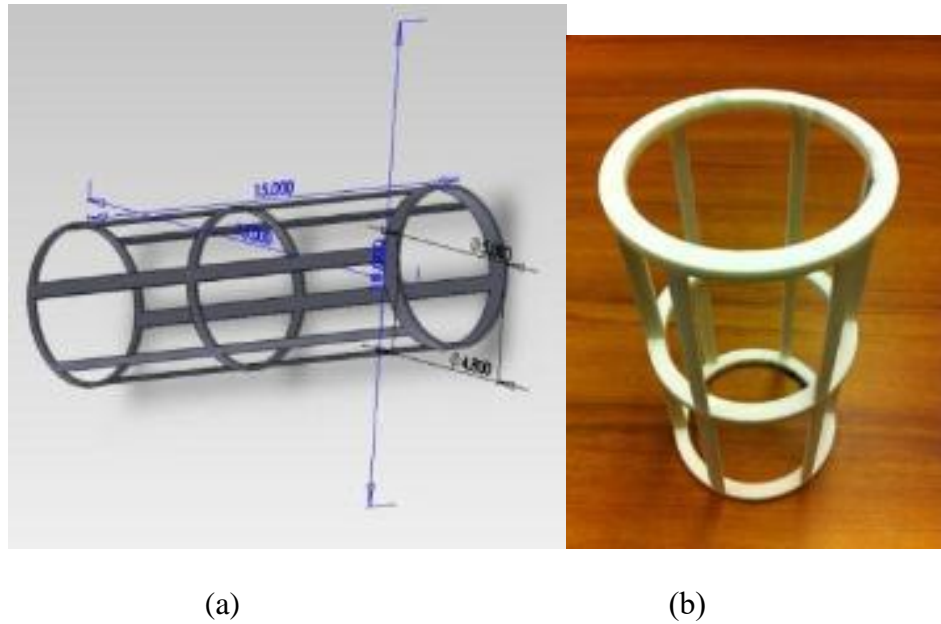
(a) Solidworks drawing and (b) product of single scaffold unit.
